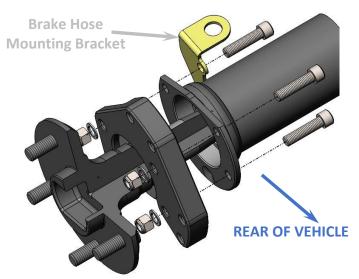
Axle Re-installation w/Primary Caliper Mounting Bracket (DB1515BR LH Side Shown)
